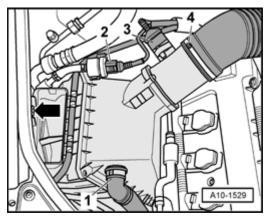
Identifying Electrical Harness Connectors, Secondary Air Injection (AIR) Pump Hose, Air
